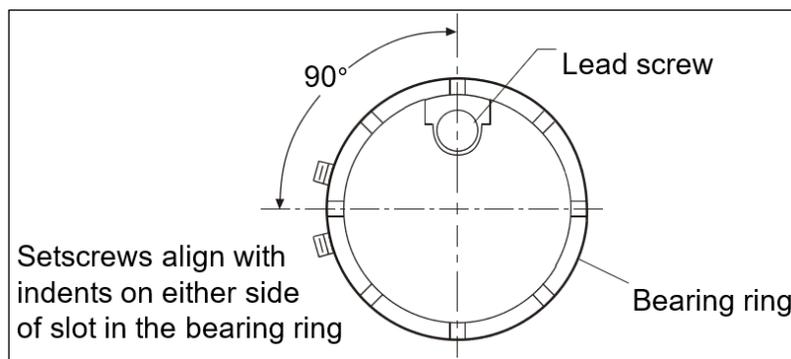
LEAD SCREW (TOP) AND BEARING RING (RIGHT)
